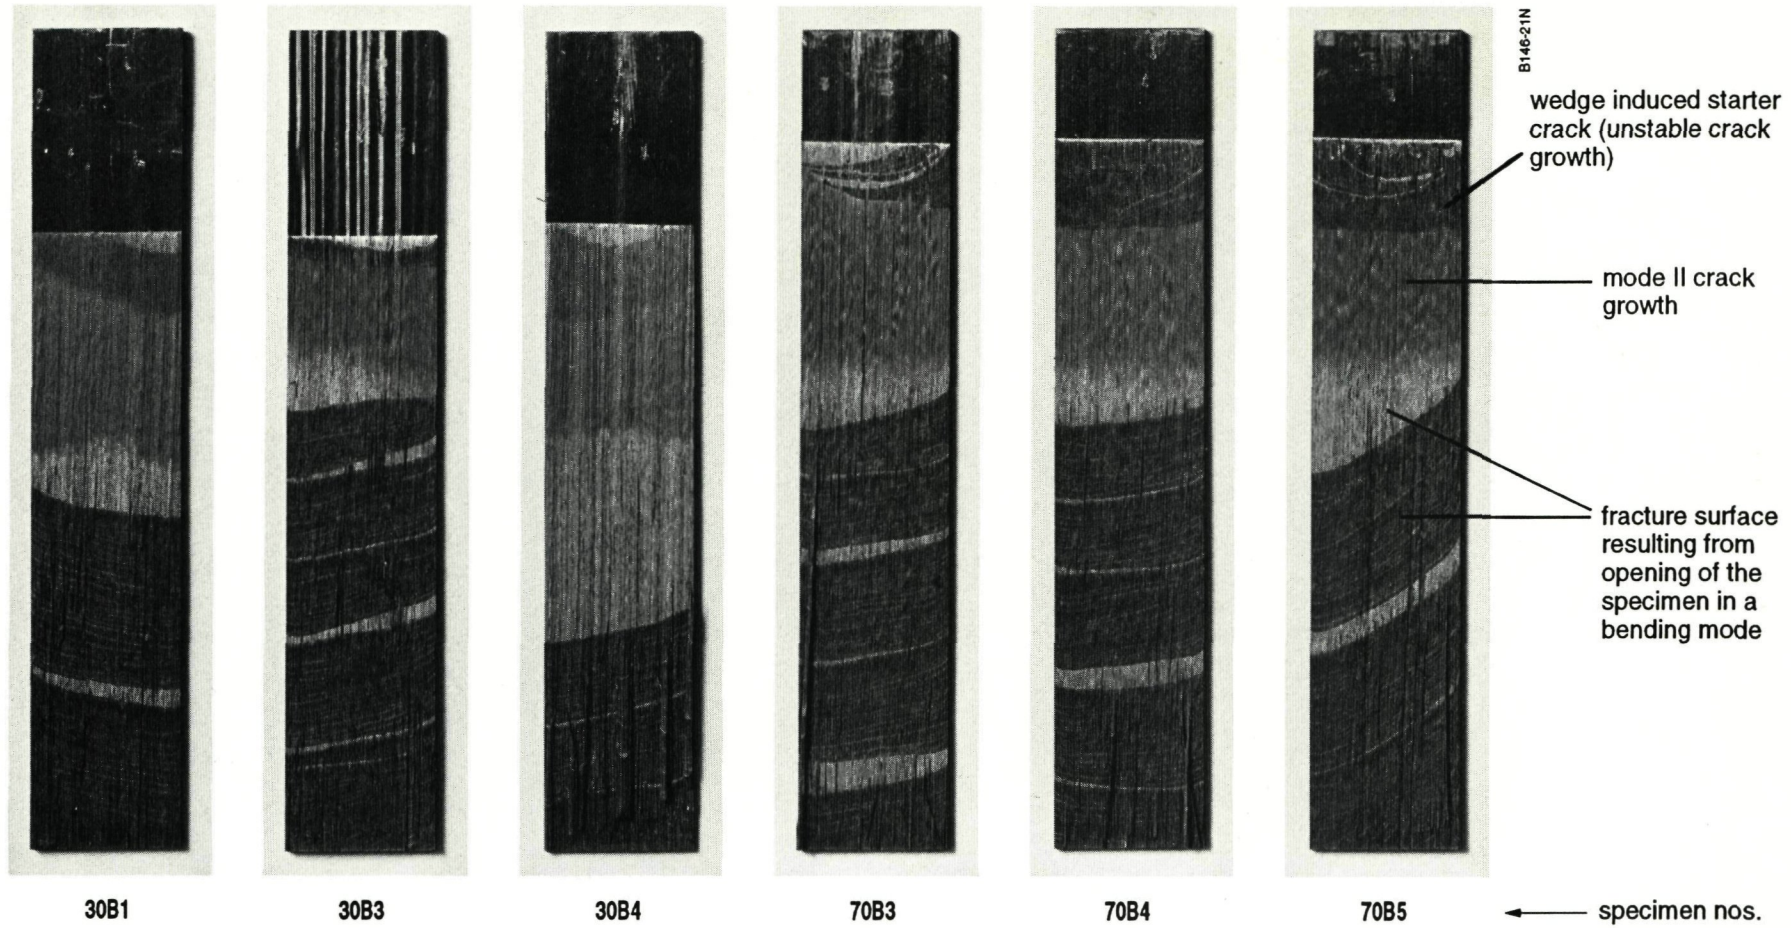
Typical fracture surfaces of ENF specimens (cooling rates 30 and 70°C/min)
